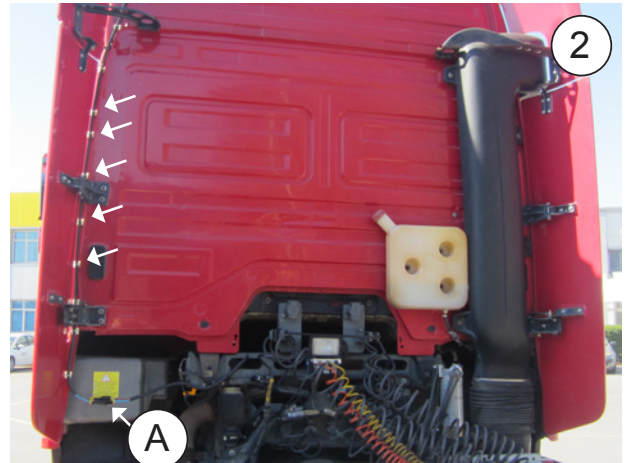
DETAILED INSTRUCTIONS ON INSTALLATING POWER CABLES
